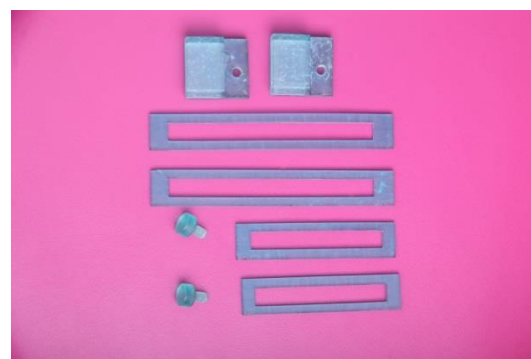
Polymer plugs made by 3D printing, horizontal plates with rectangular holes and fixing screws
